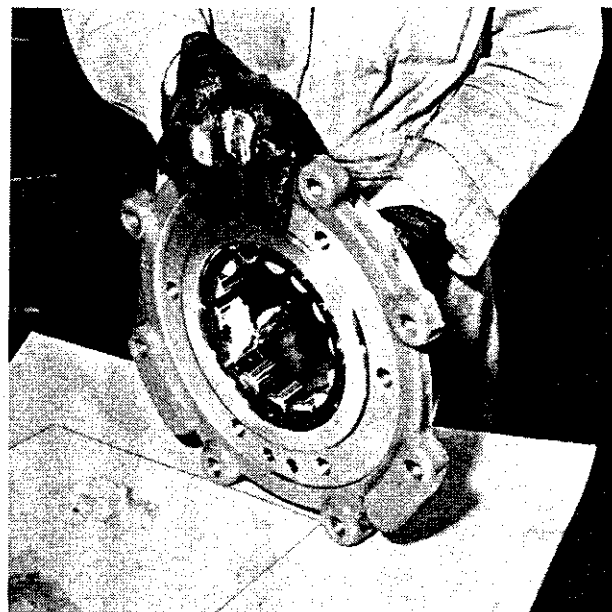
Coating I.D. of Roller and Cage Assembly 7750
